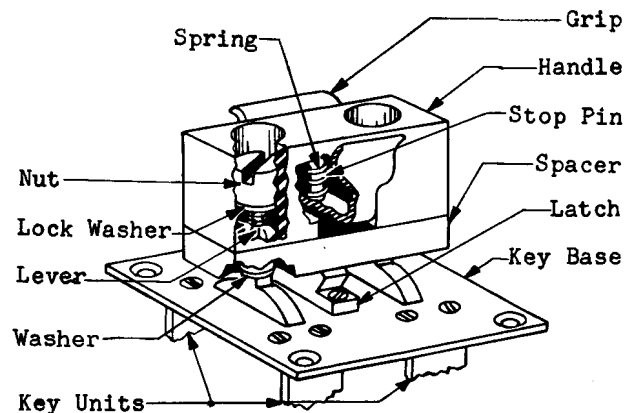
571-type Key Showing Handle Section and Details, Including Locking Device
